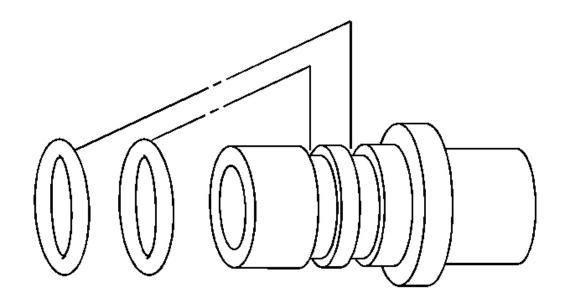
Removing/Installing O-Ring Seals Courtesy of GENERAL MOTORS CORP.
